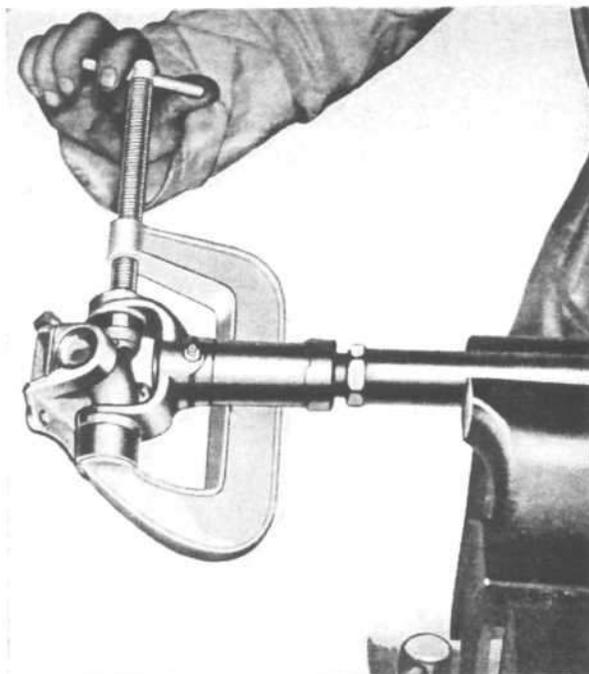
UNIVERSAL JOINT BEARING CLAMP
